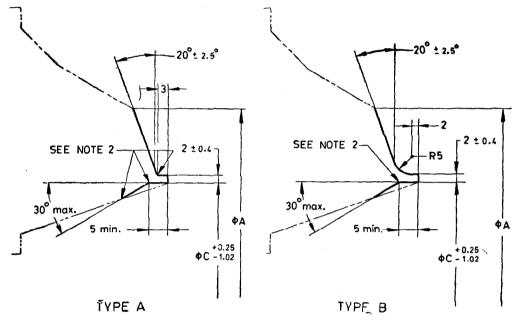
WELD BEVEL DETAILS INTENDED FOR USE OF GAS TUNGSTEN ARC ROOT PASS WELDING OF NOMINAL WALL THICKNESSES OVER 3 mm TO 10 mm INCLUSIVE
